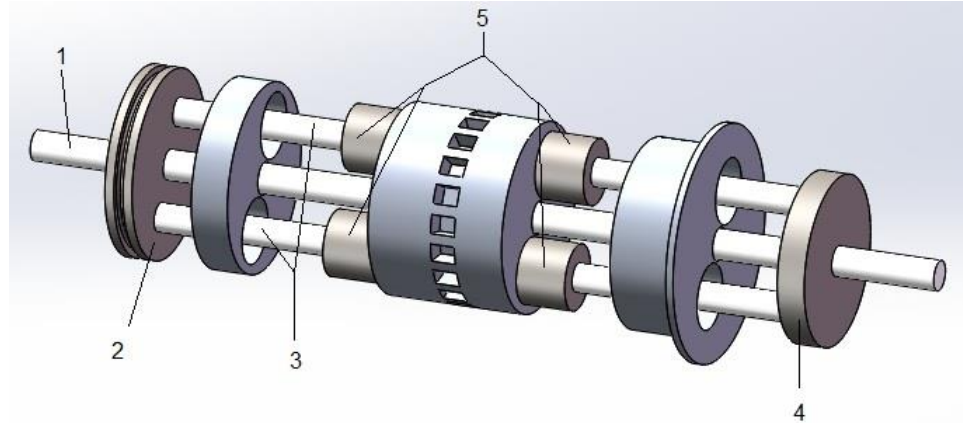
The second configuration of the frictional cylinder. 1. Steel shaft, 2. shaft collar with groove, 3. guide shaft, 4. shaft collar, and 5. linear ball bearing.
